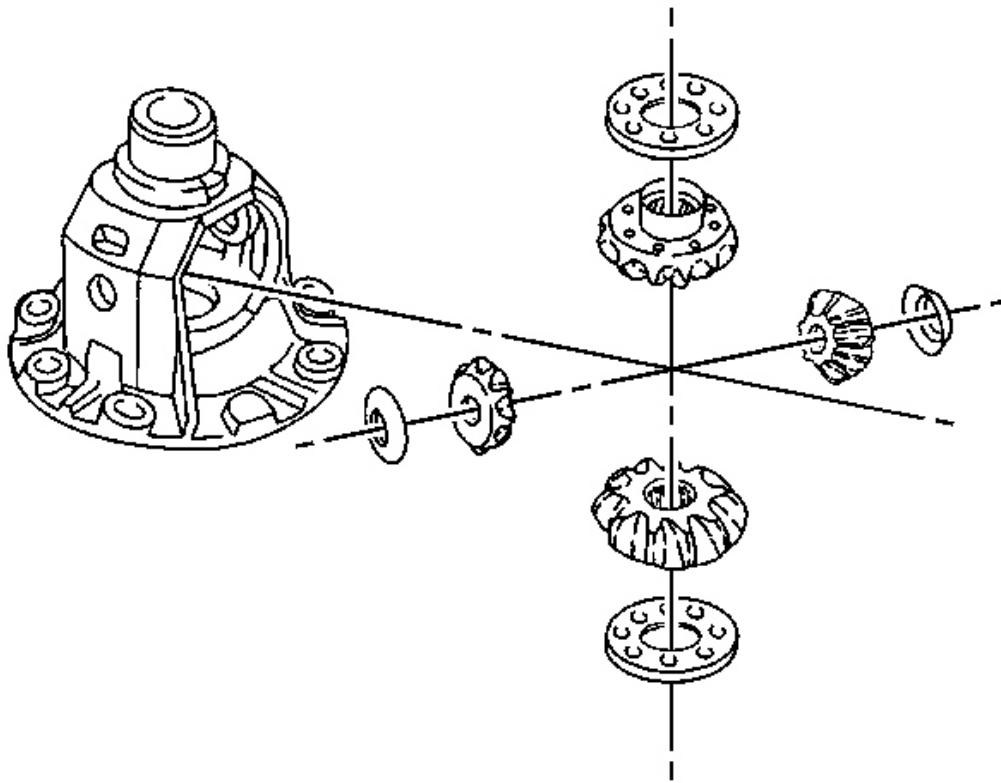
Differential Side Gears, 2 Differential Pinion Thrust Washers, And 2 Differential Side Gear Thrust Washers
